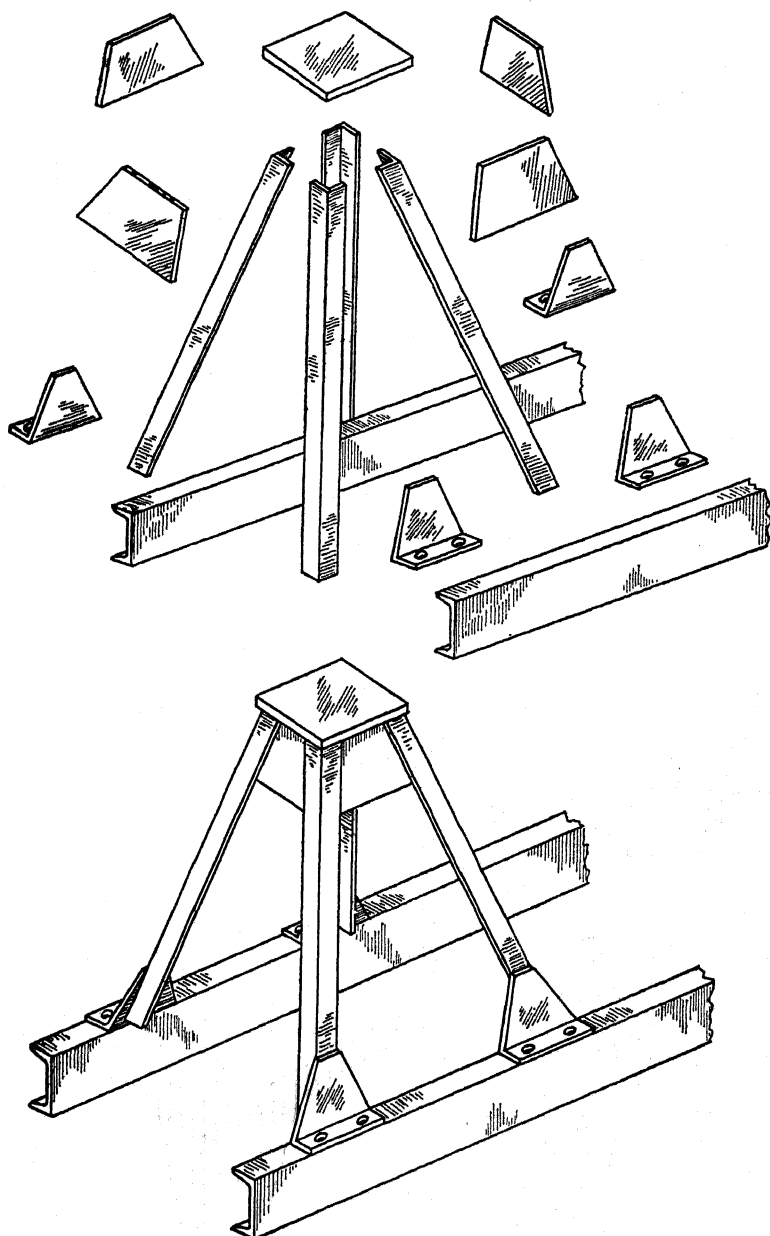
A support for a bearing which requires considerable clearance beyond it. It is bolted to the base for maintenance purposes.
